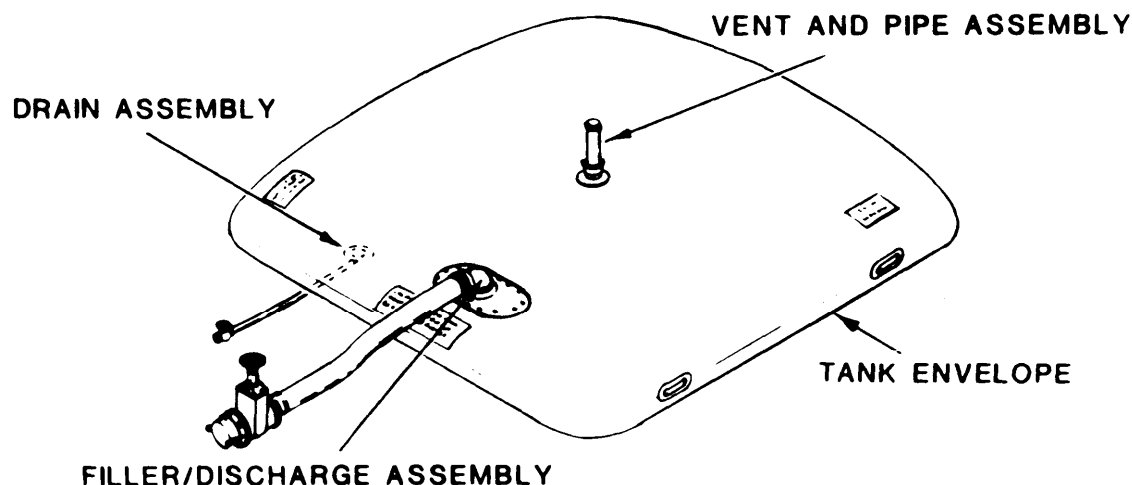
Collapsible 3000 Gallon Tank Assembly
